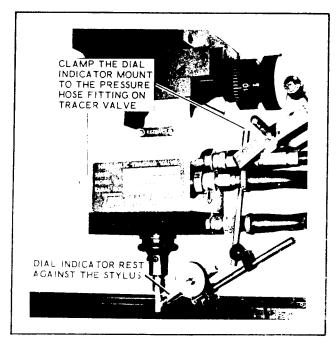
Method of Attaching Dial Indicator to Tracing Valve for Checking Spindle Deflection
